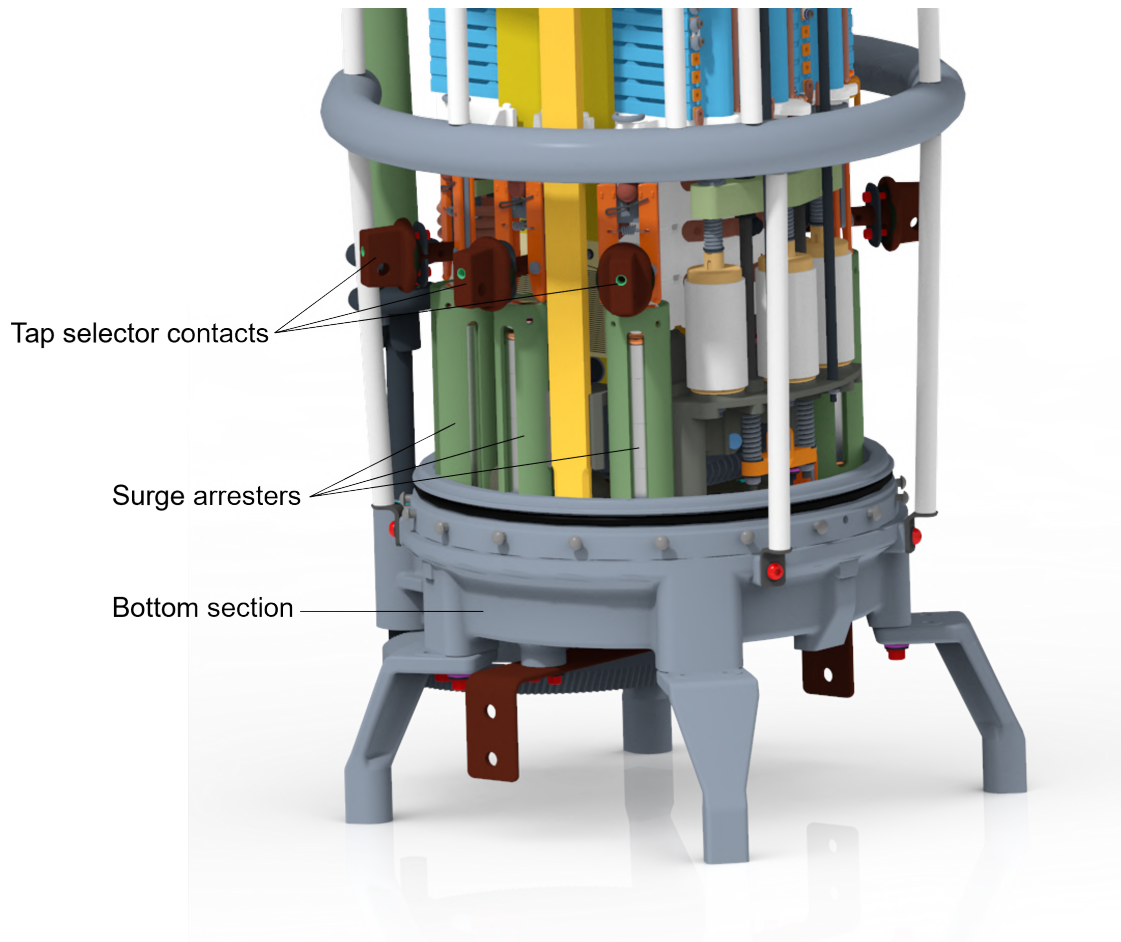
Concept "Internal Bottom" mounted inside of the OLTC housing.
